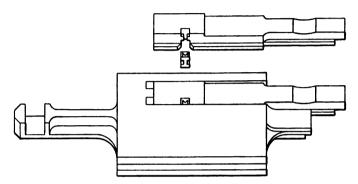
Monotype casting machine; matrix-holder for sorts-casting up to 14-point.
